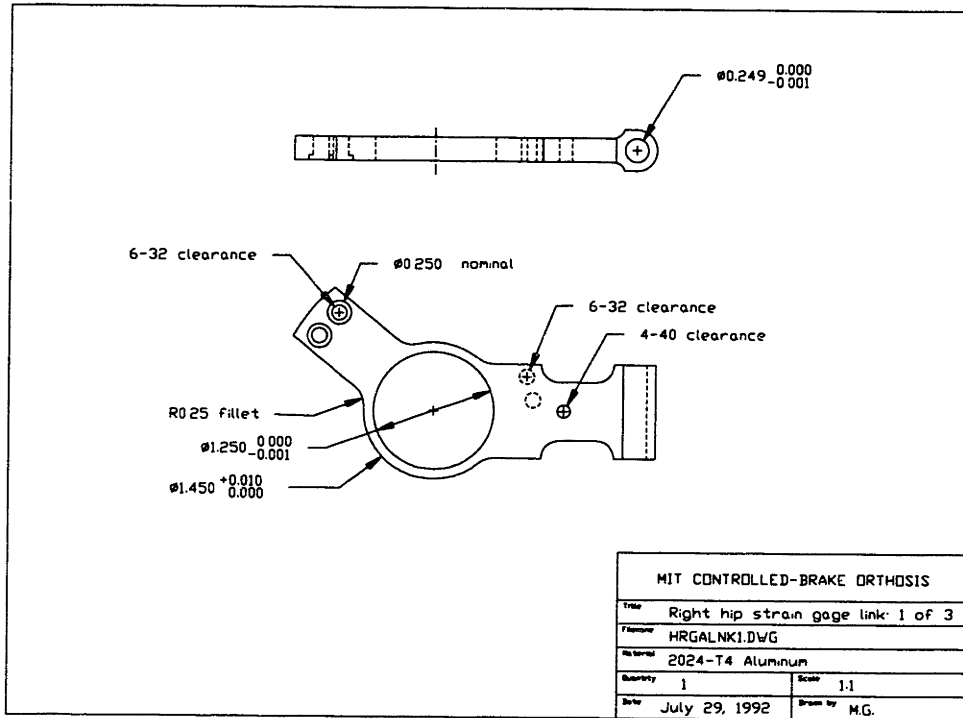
Link that couples right hip gear to the brace (drawing 1 of 3).
